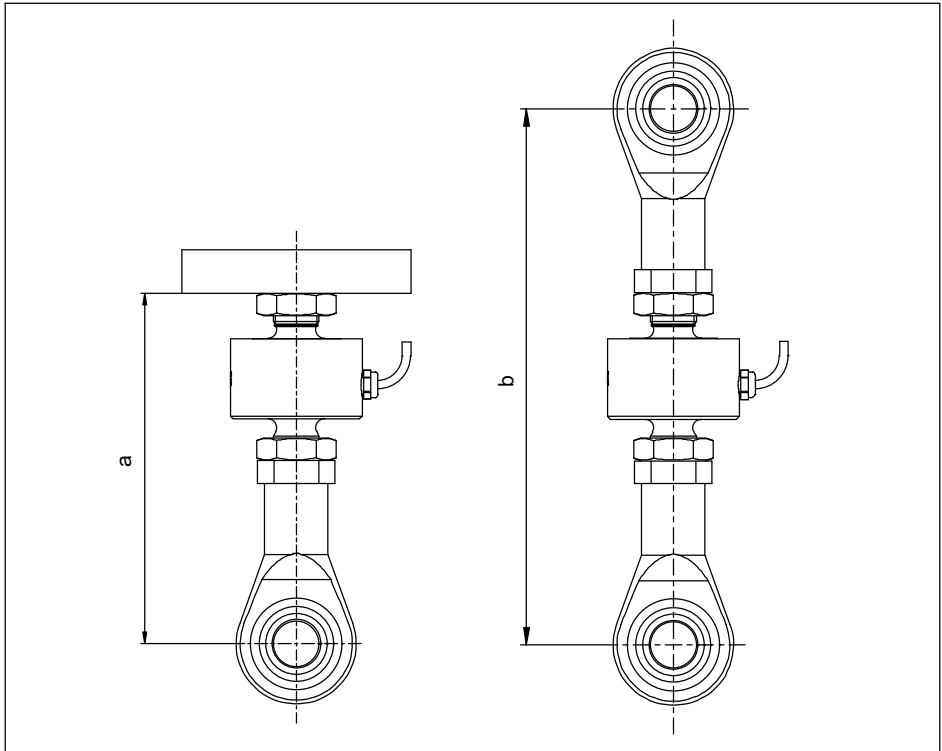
U9C dimensions when using one or two knuckle eyes.
